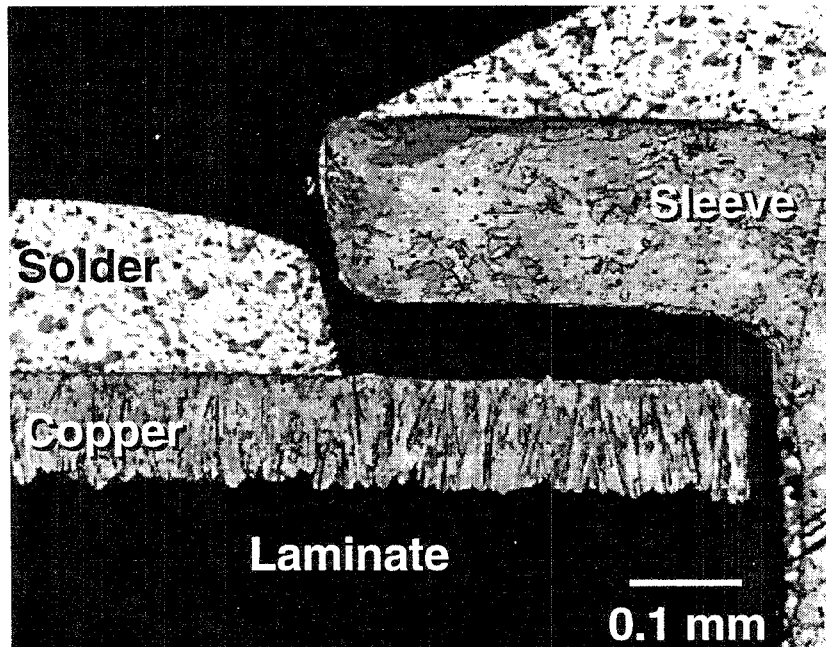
A third quadrant in which complete cracking of the connection has occurred.
